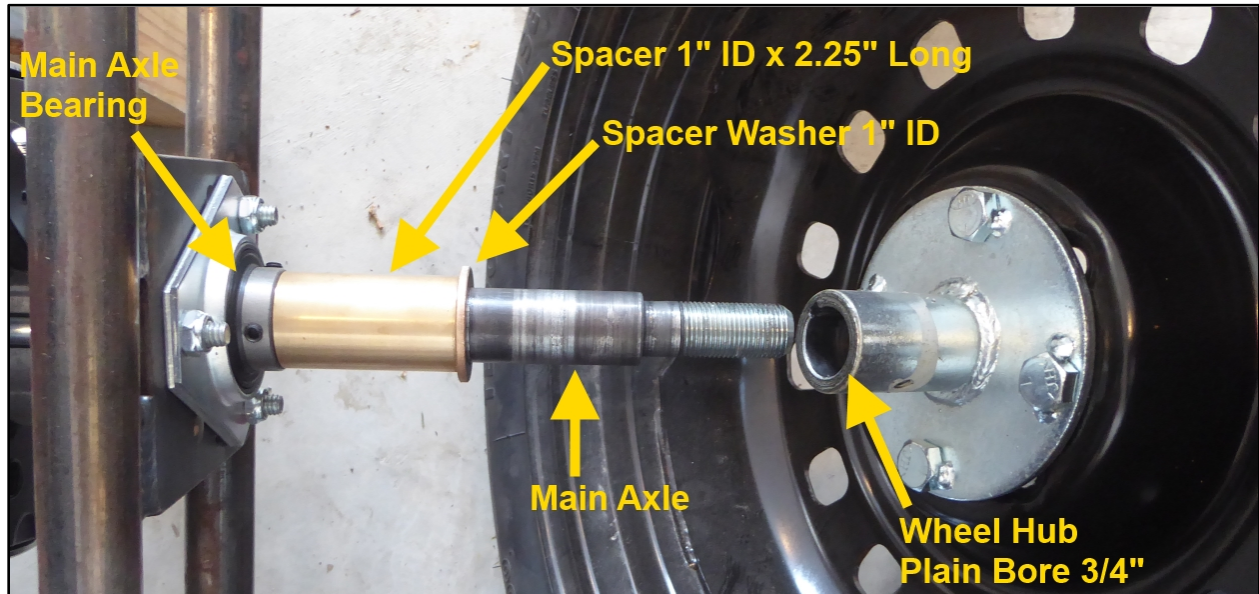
Drive side left rear wheel. This wheel freewheels. Not driven.
